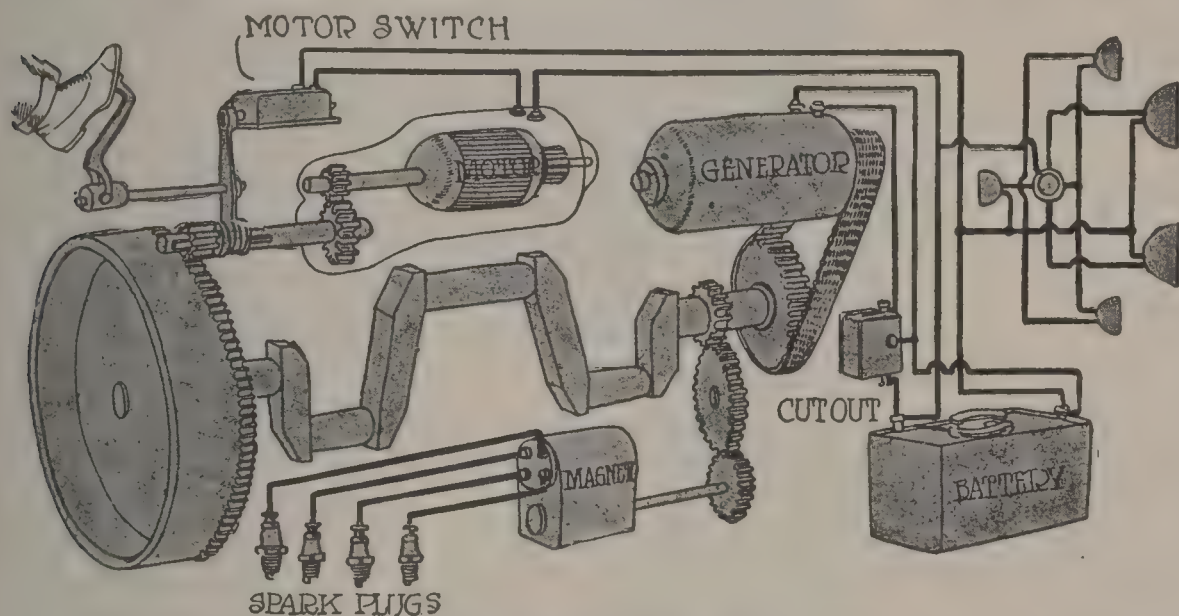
Typical arrangement three-unit system, showing the mechanical and electrical connections of the separate units, the cranking motor, lighting generator and ignition magneto
